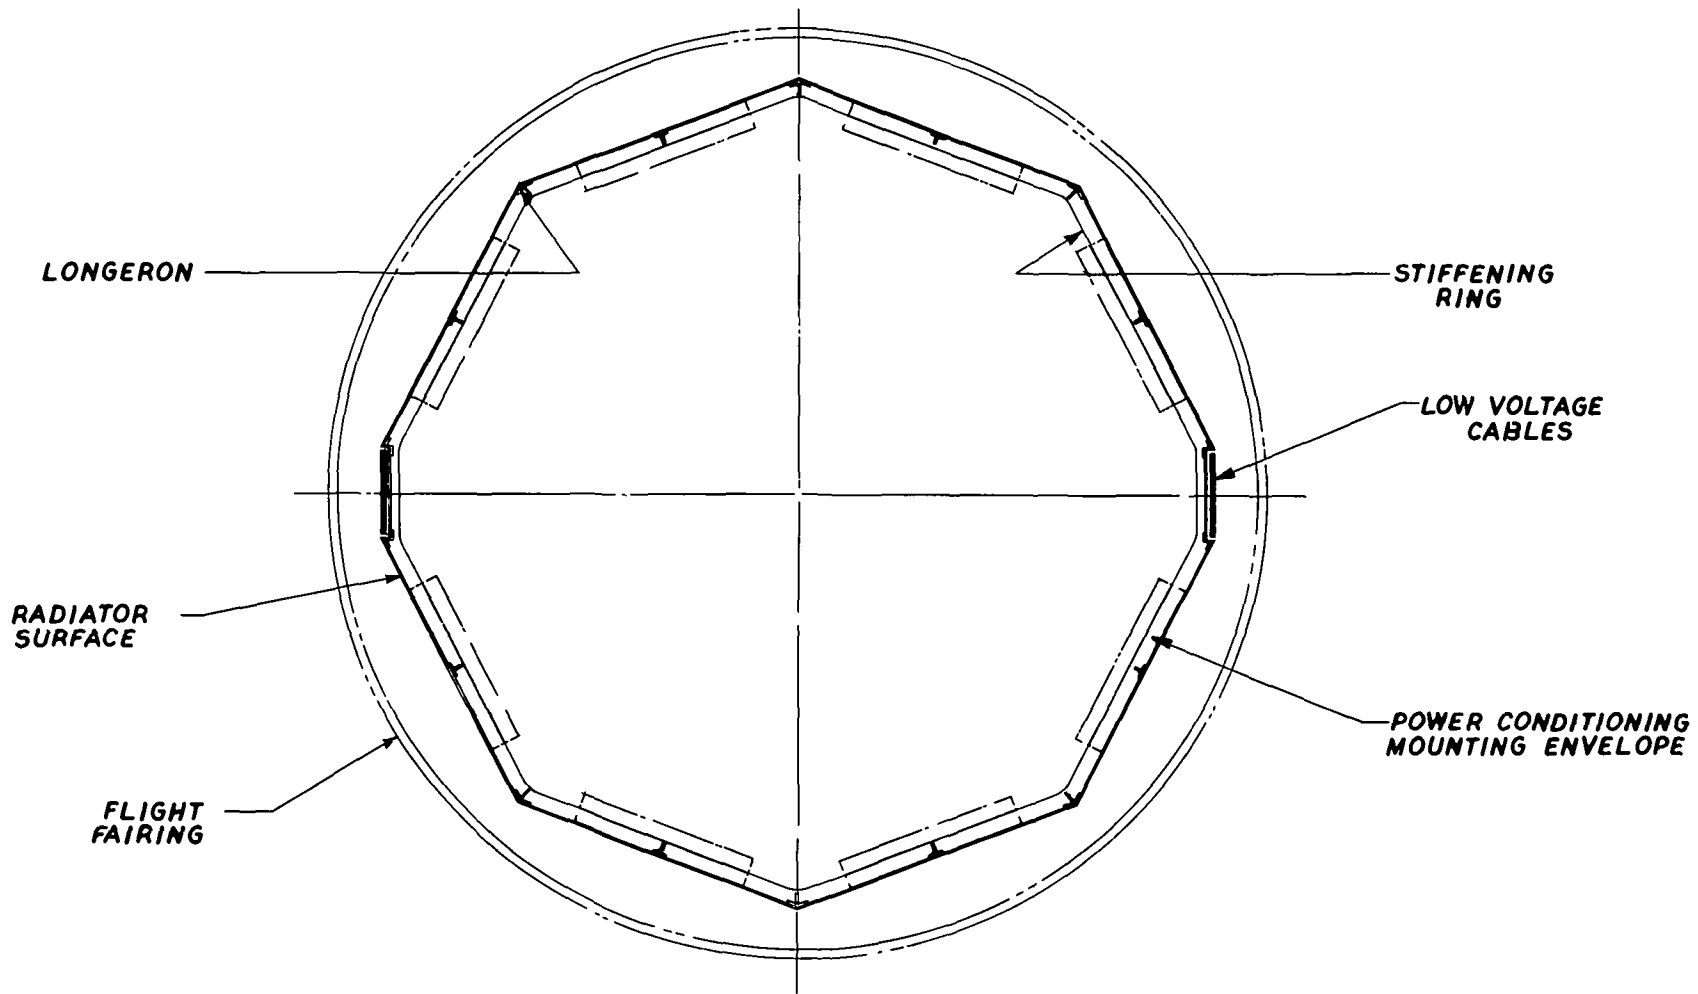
Power Conditioning Radiator Cross-Sectional View, Externally Fueled Reactor/Spacecraft
